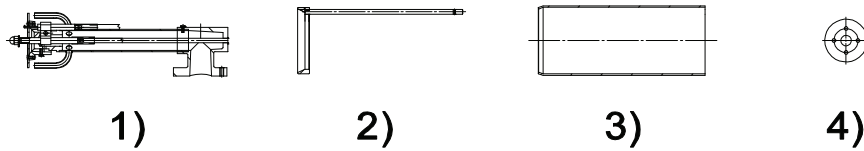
1) Head kit 2) Combustion head regulation 3) Blast tube 4) Tablet gas
